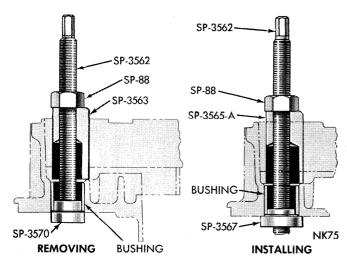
Replacing Pinion Housing Drive Shaft Bushing
